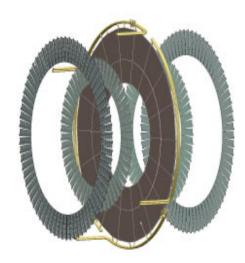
Pixel disk structure showing sectors held by a support ring with disk modules attached to both sides of a sector.
